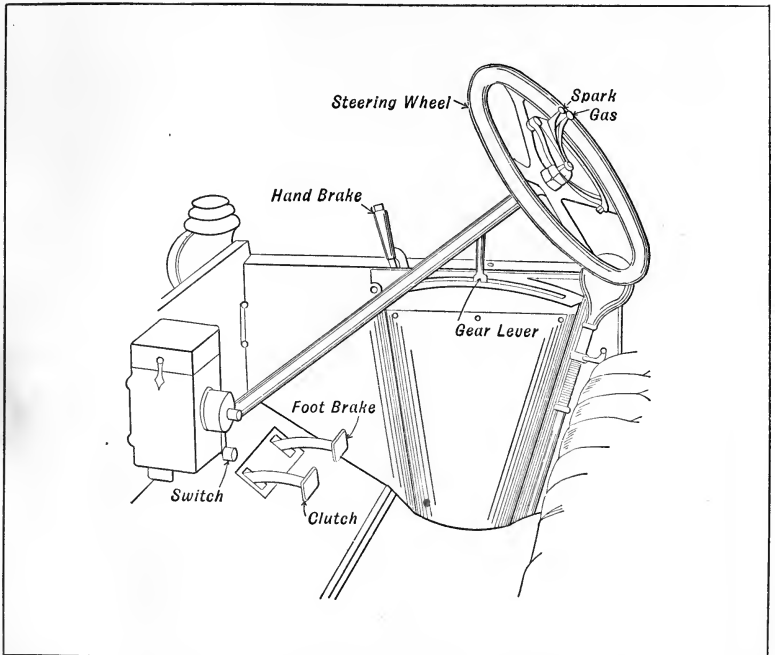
Complete Control System of Buick Automobiles Showing Engine-Regulating Levers on Steering Wheel, Enclosed Hand Levers and Foot Control of Clutch and Running Brake.
